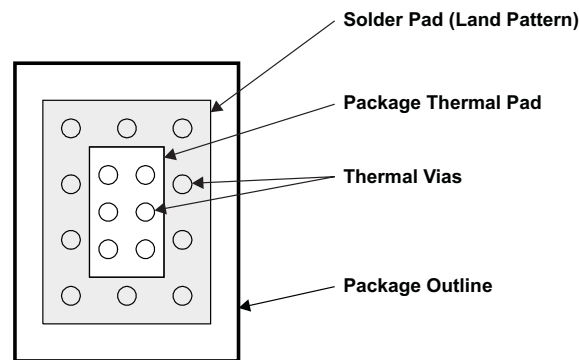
Package and PCB Land Configuration for a Multilayer PCB
